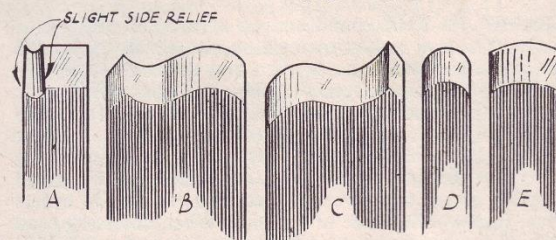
TYPICAL MOULDING PLANE CUTTERS
